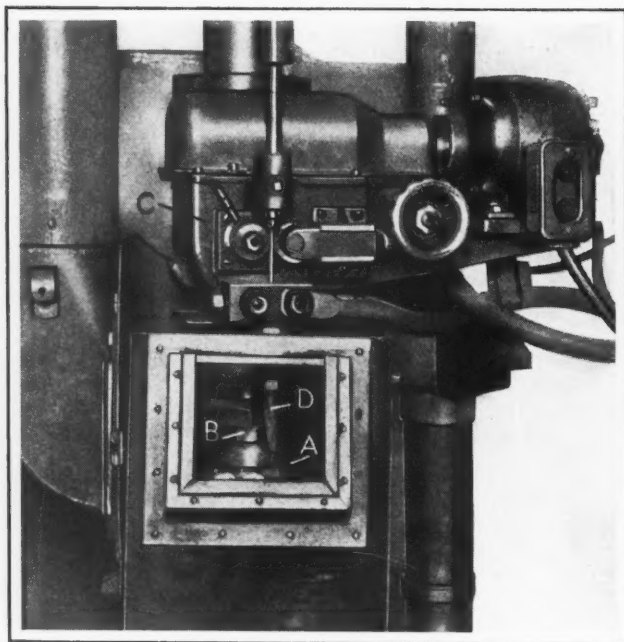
Welding Operation which Completes the Assembly of the Shock Absorber Units
